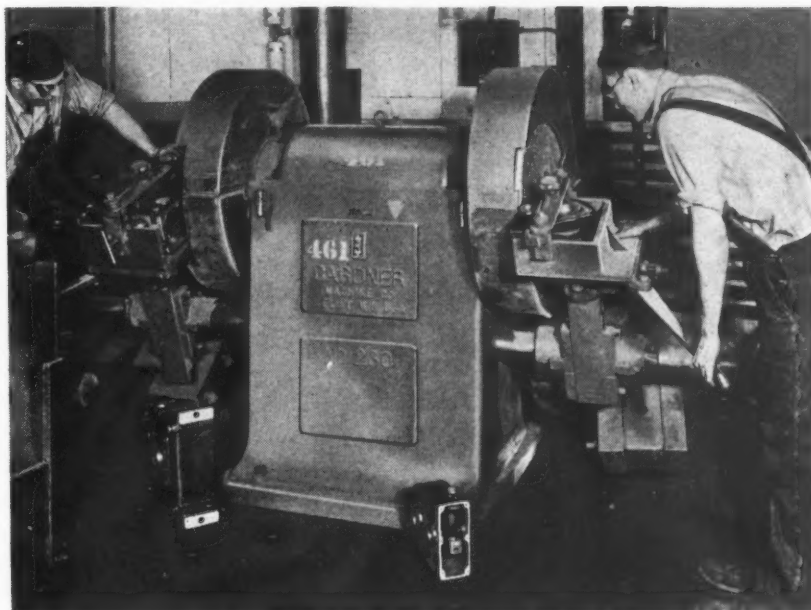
Disk Grinder with Two Universal Lever-feed Tables, Each Carrying a Special Fixture
